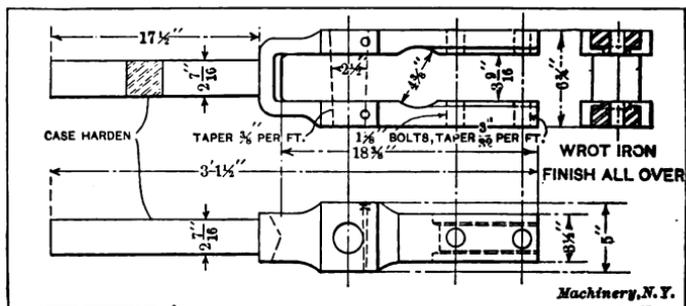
Radius Rod Extension for Valve Gear shown in Fig. 1
